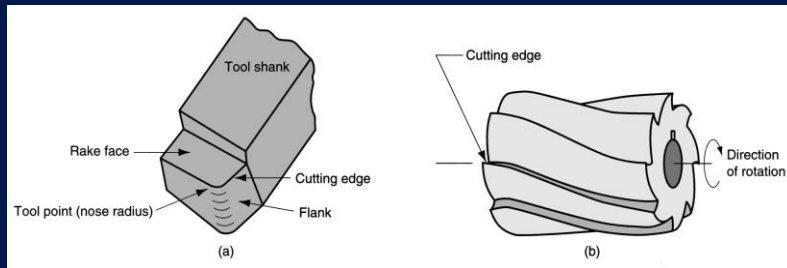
(a) A single-point tool showing rake face, flank, and tool point; and (b) a helical milling cutter, representative of tools with multiple cutting edges
